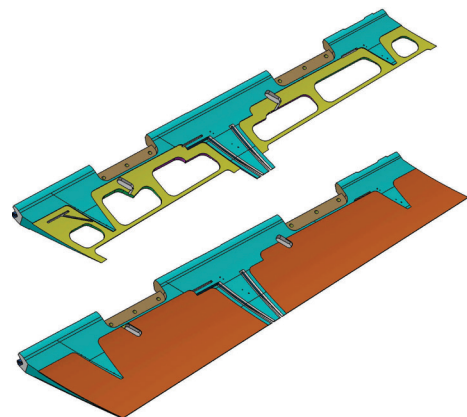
CAD view of the aileron structure (above: without external composite skin)
